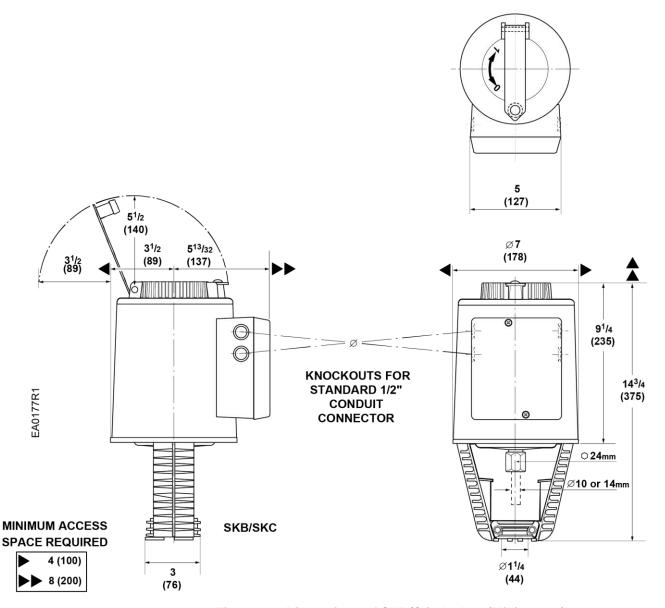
Dimensions of SKB/C in Inches (Millimeters).
